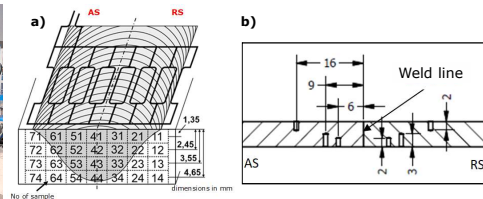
Position of: a) the microspecimens in weld for microscopic examination and tensile test, b) the thermocouples in the weld: 1 - in the top, 2 - in the middle, 3 - in the bottom
